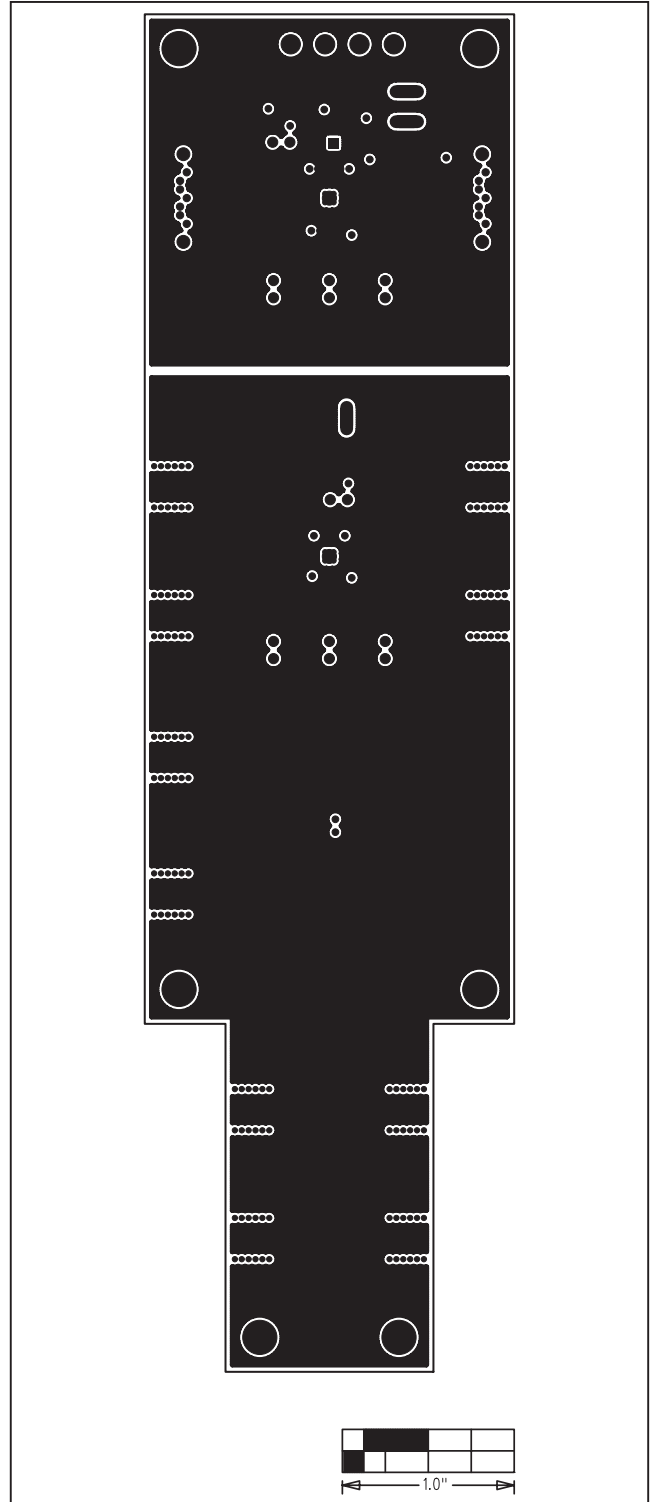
MAX4951B EV Kit PCB Layout—Inner Layer 3
